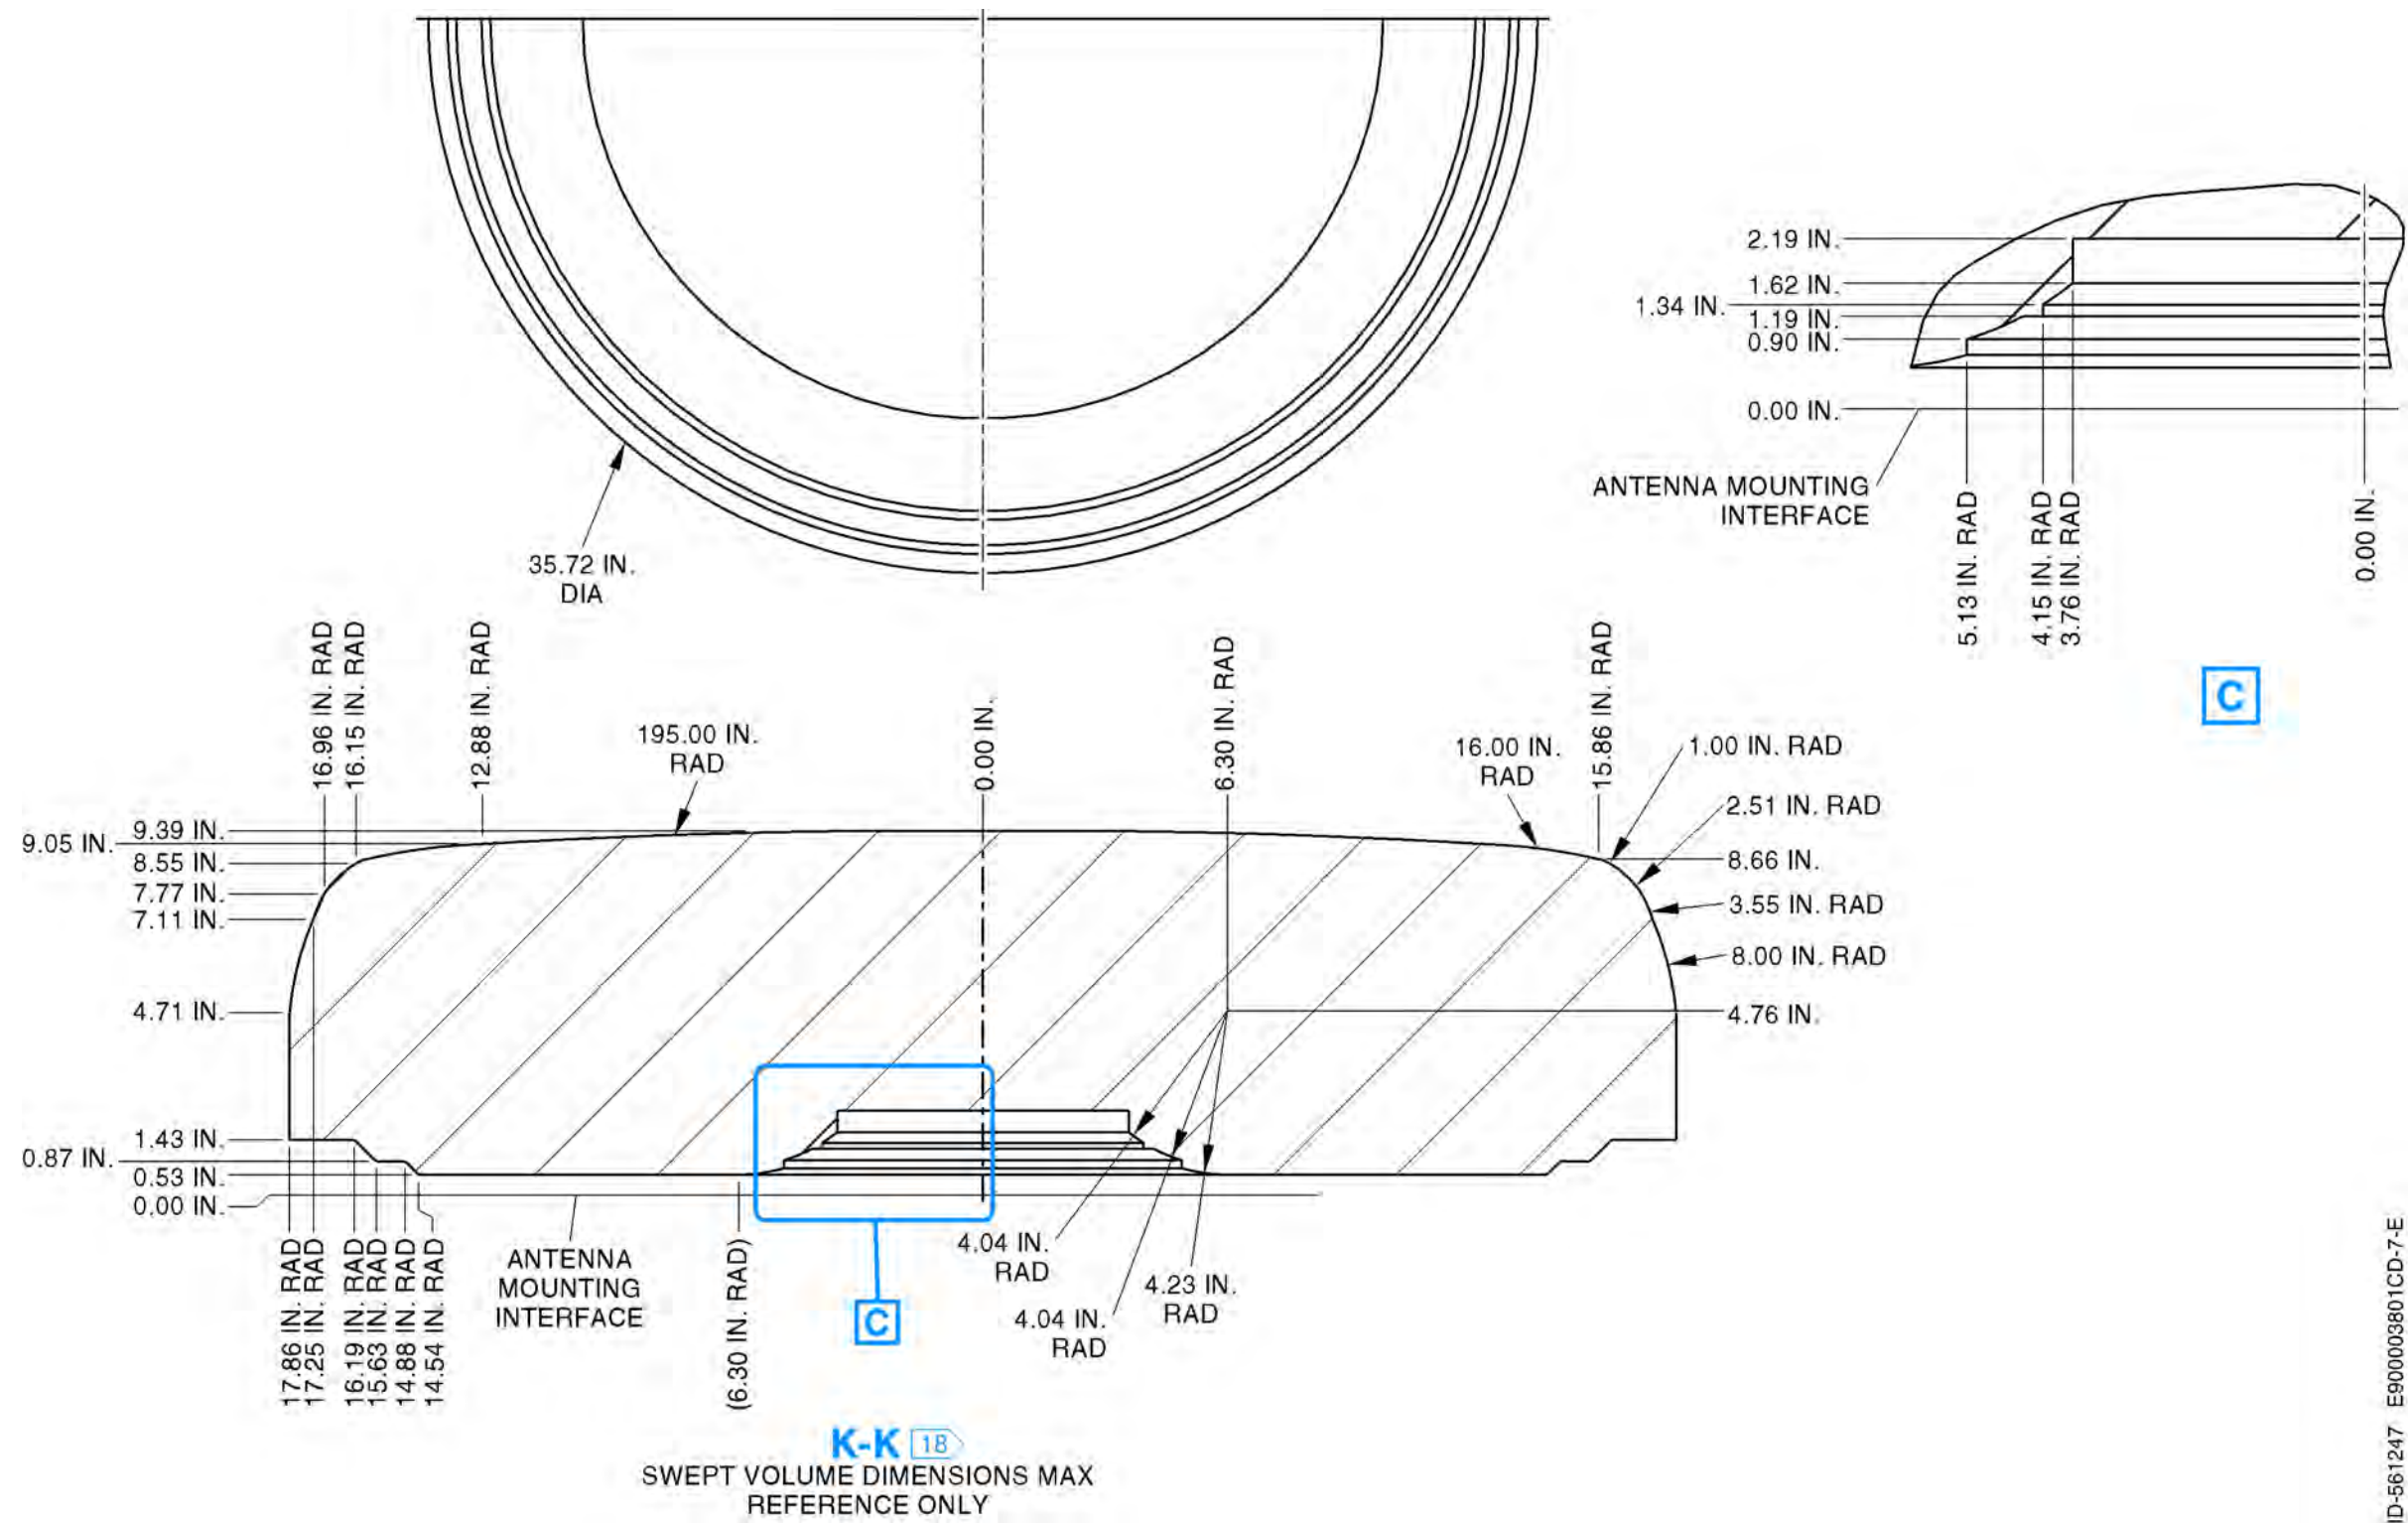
FMA Outline and Installation Drawing (Sheet 6 of 12)
